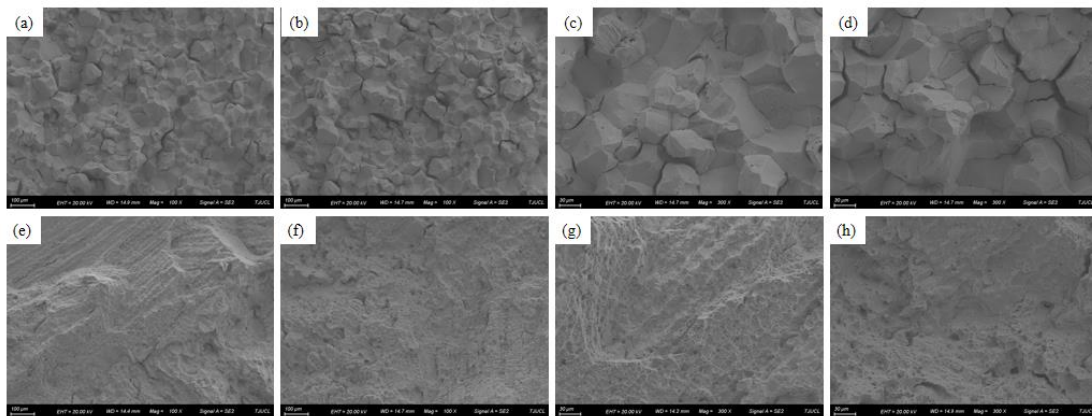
Typical fracture morphology of welded joint specimens after service:
